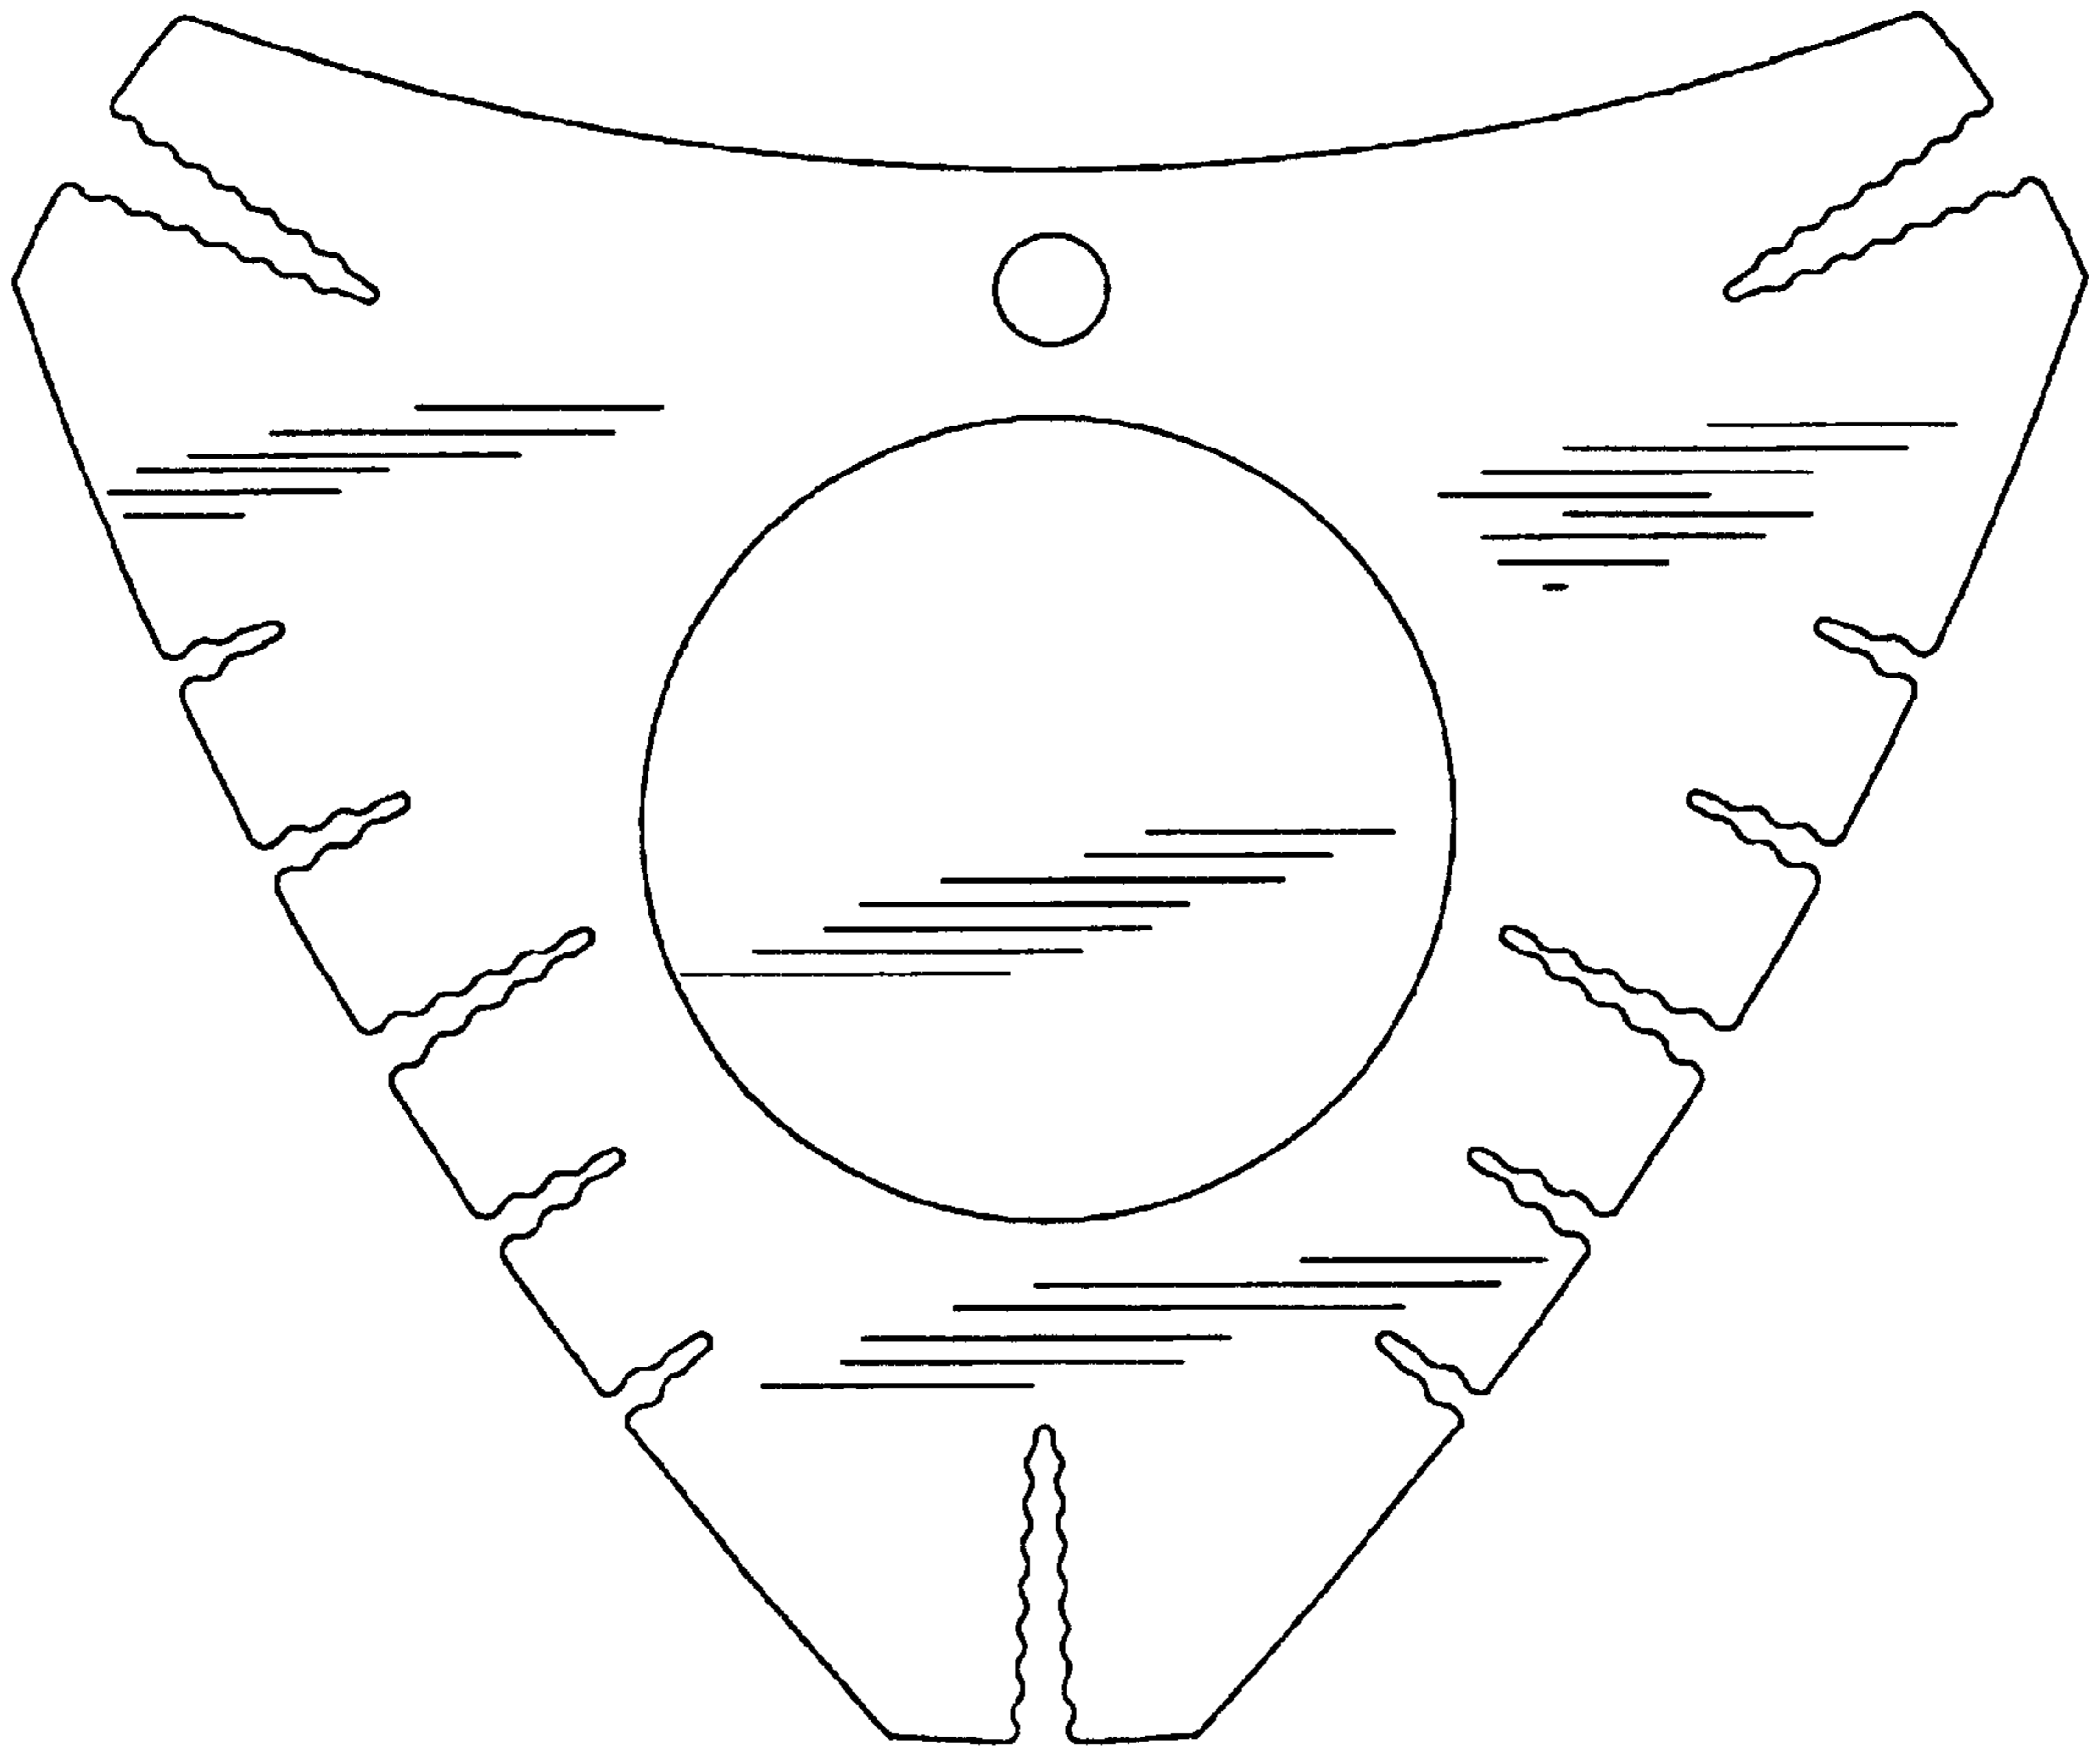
is a top plan view of the nail gripping tool showing my new design;
